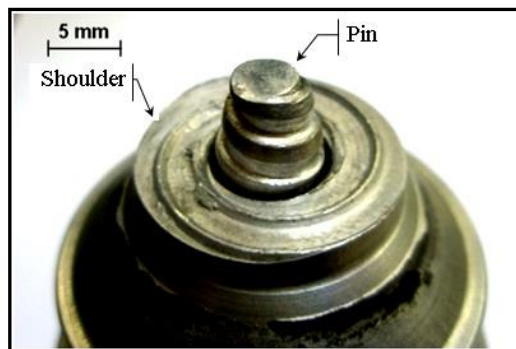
Friction stir welding tool (Santos, et al., 2011).
